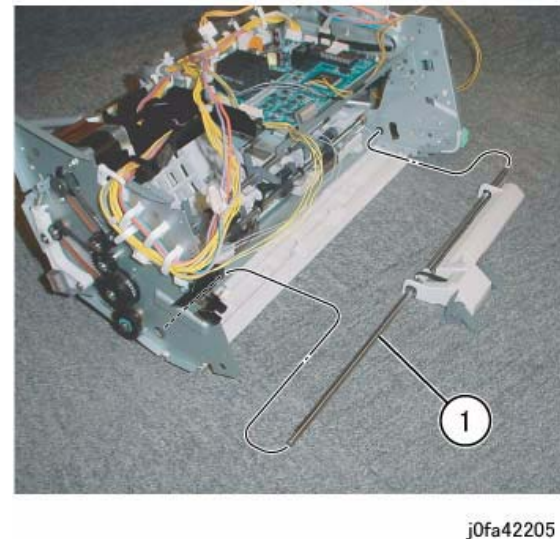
Removing the Paddle Link Assembly (j0fa42205)
